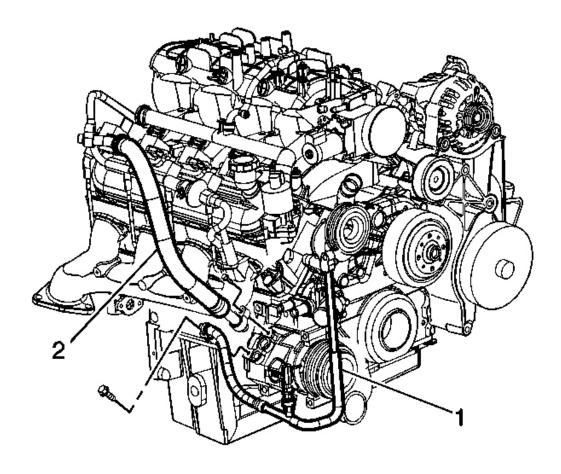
Identifying Suction/Discharge Hoses To A/C Compressor Courtesy of GENERAL MOTORS CORP.
